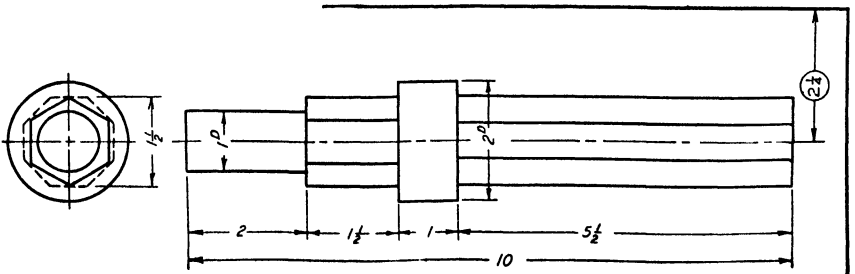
Prob. 370. Make an isometric drawing of the *special rod*. Use layout of Fig. 22-246 for Probs. 369 and 370.
